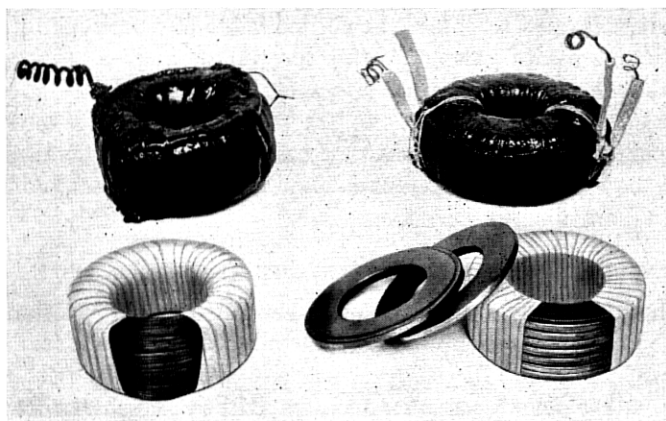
Early cable loading coils and their cores. At left: Iron wire core coil; core has insulating-binding tape partly removed to show core construction. At right: Compressed iron powder core coil; 7-ring core has binding tape partly removed. Also 2 individual core rings.
